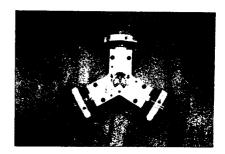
This is a close-up view of the fixture used for measuring chips with the cover removed for loading.
